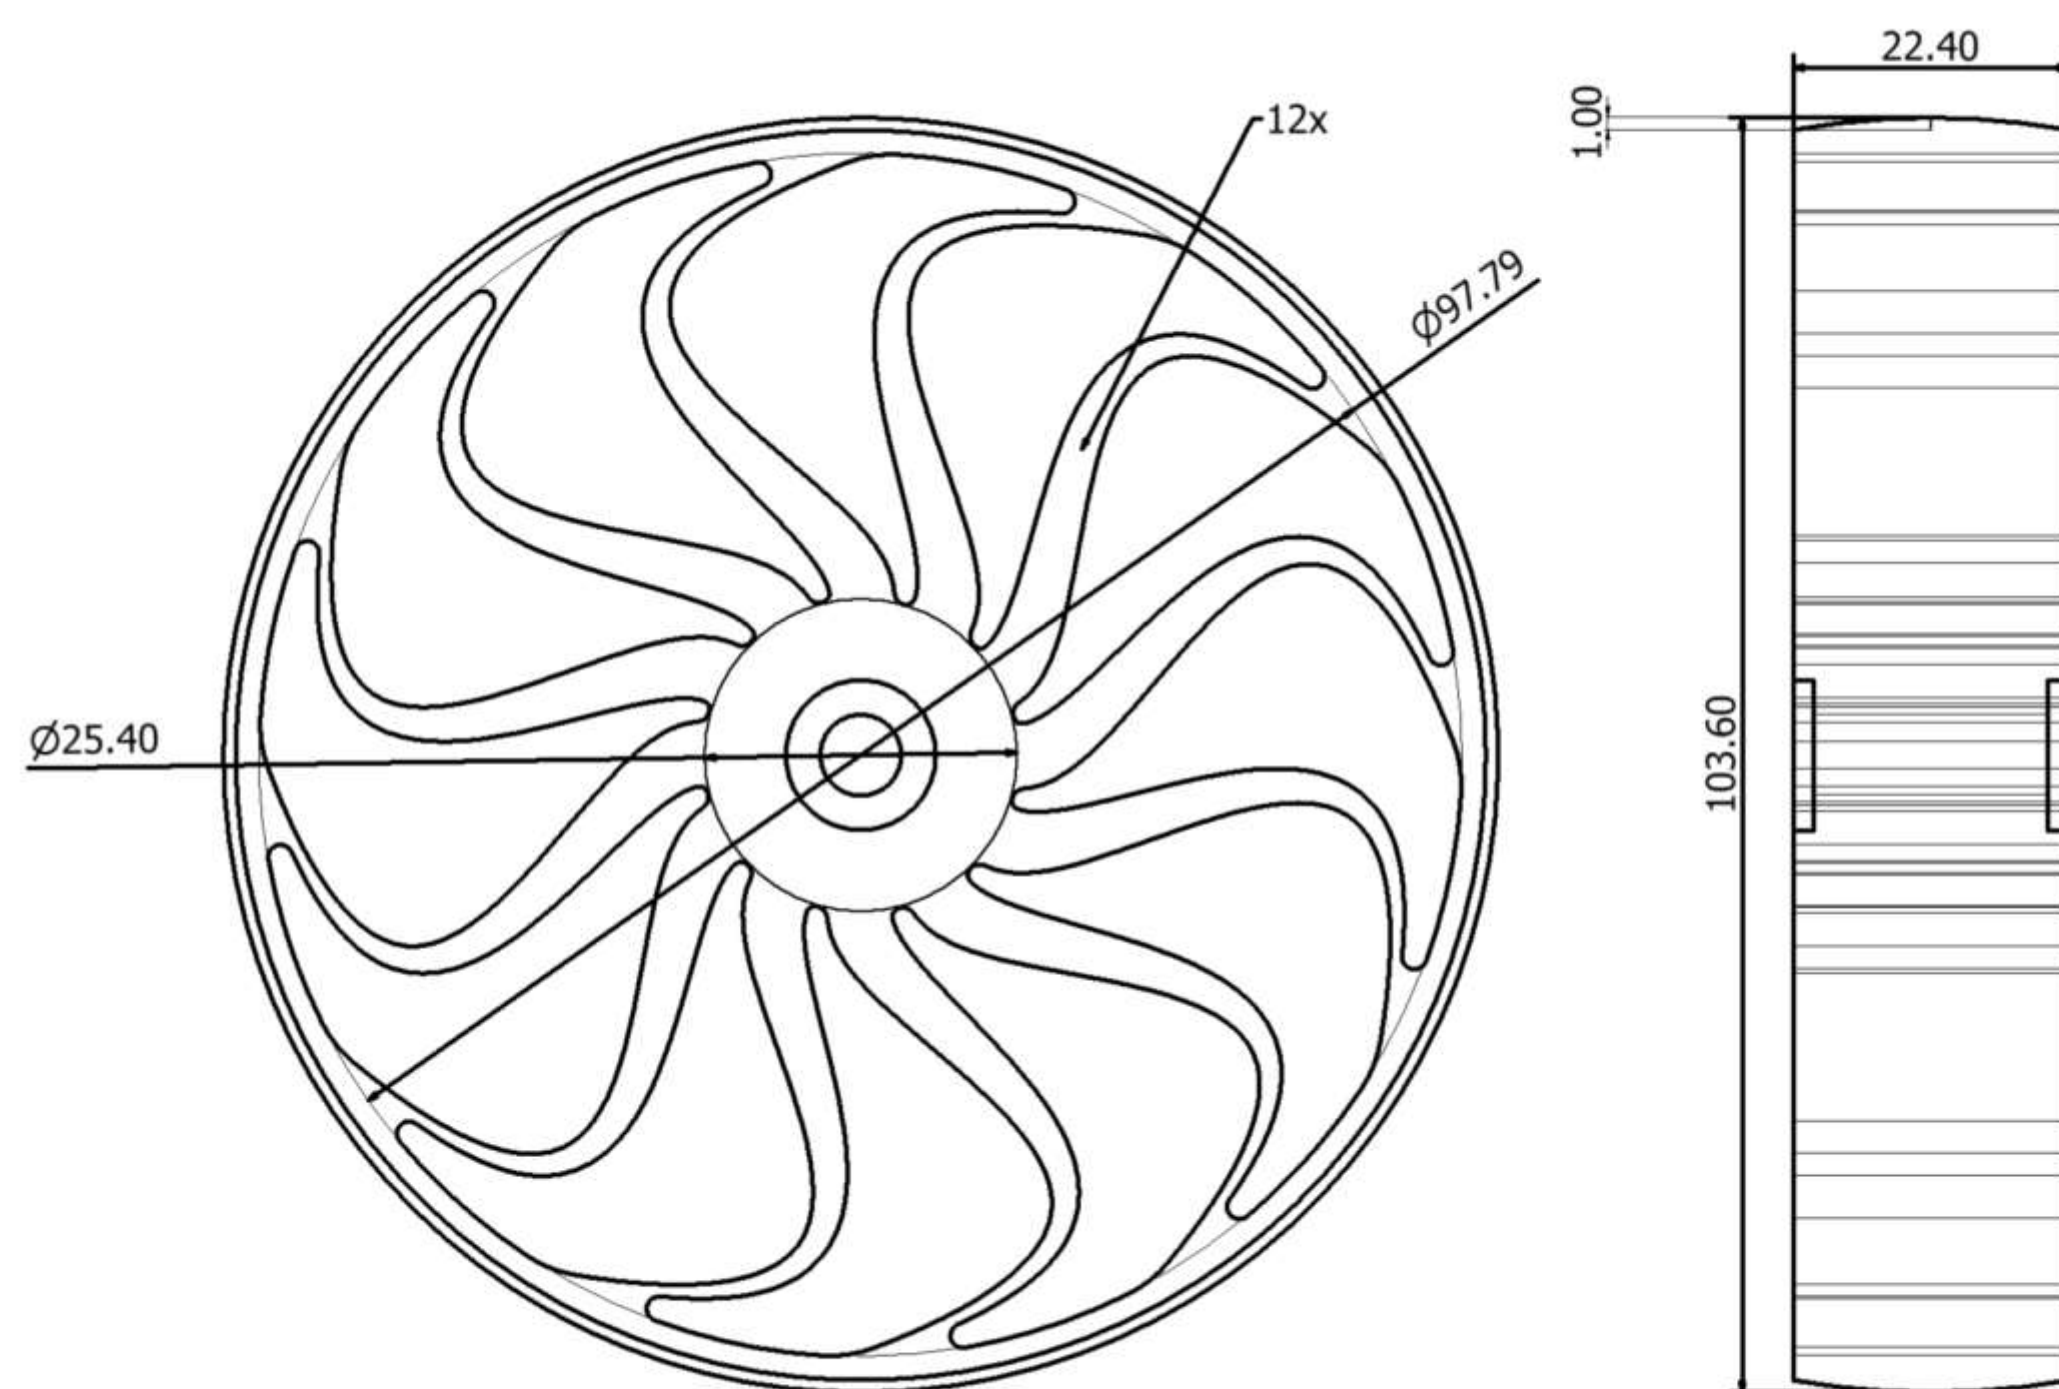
Front and side view of optimized wheel showing hub, rim, transverse crown, height, and spoke count dimensions.
